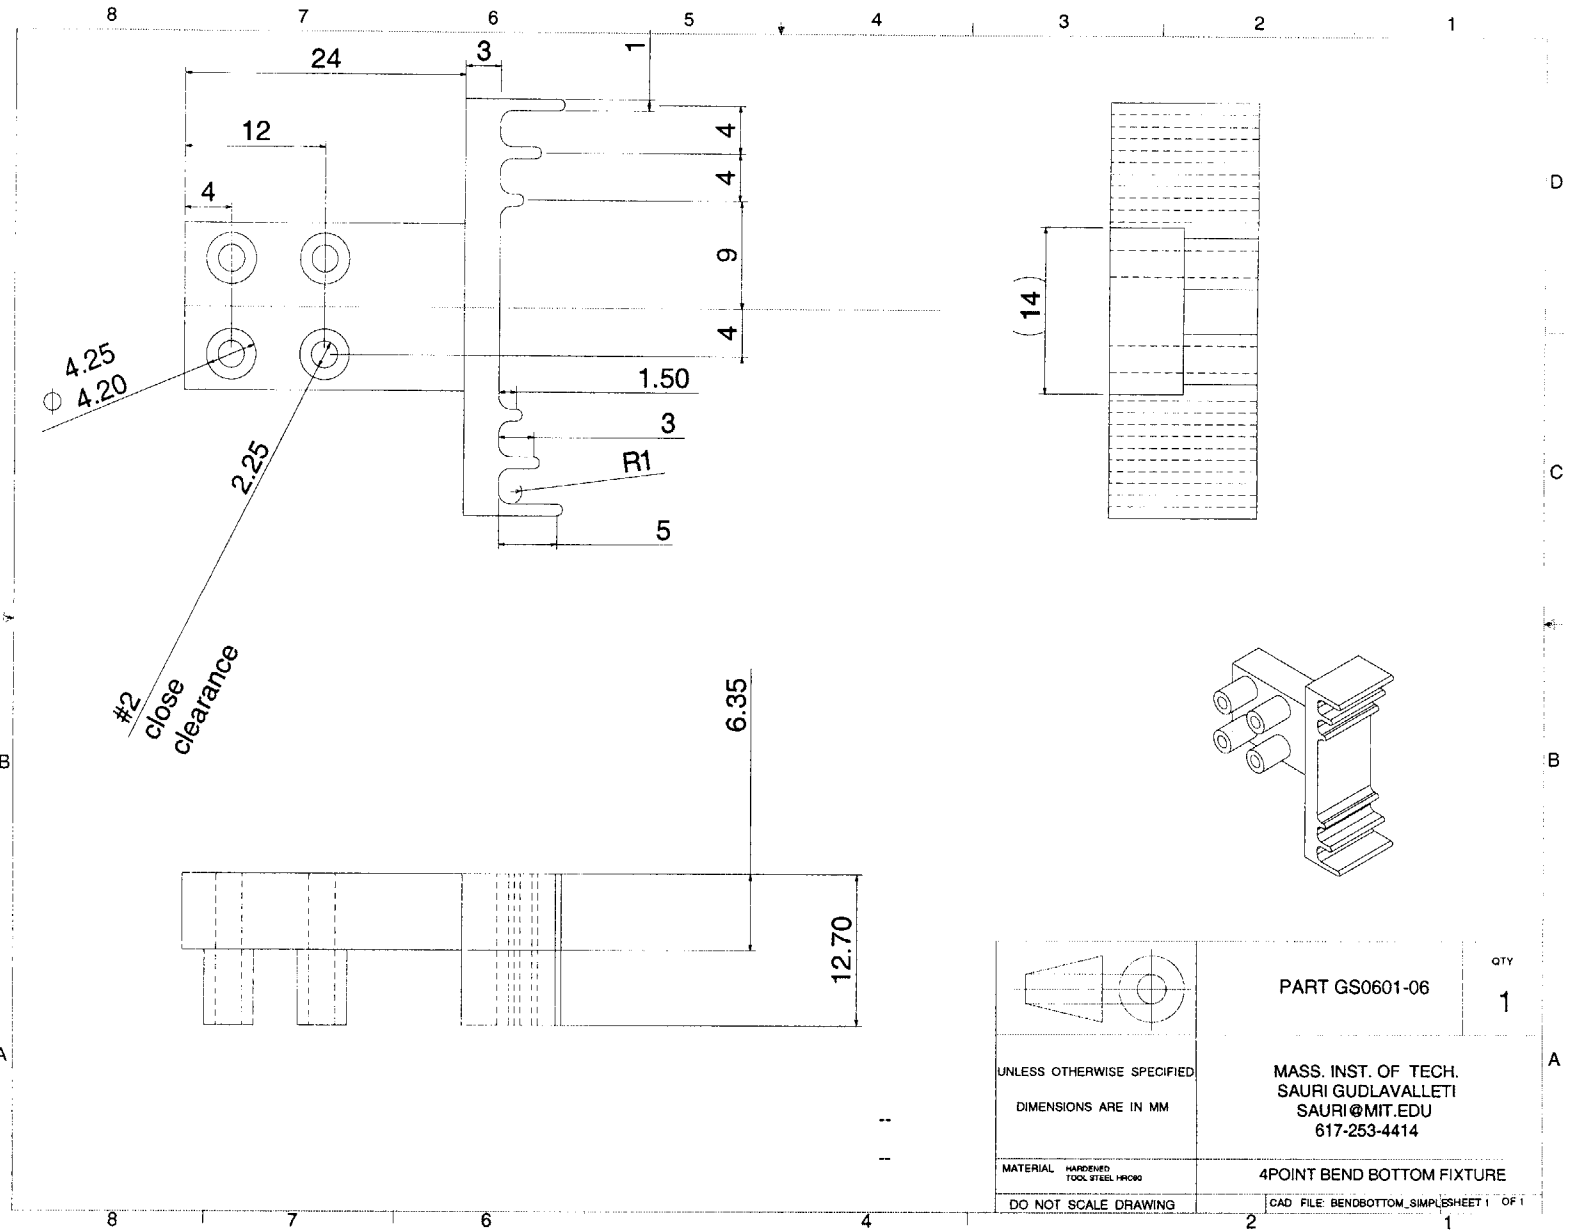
Part GS 0601-06. Multiple span bending fixtures. Ref. Fig. 4-6 for an assembly drawing.
